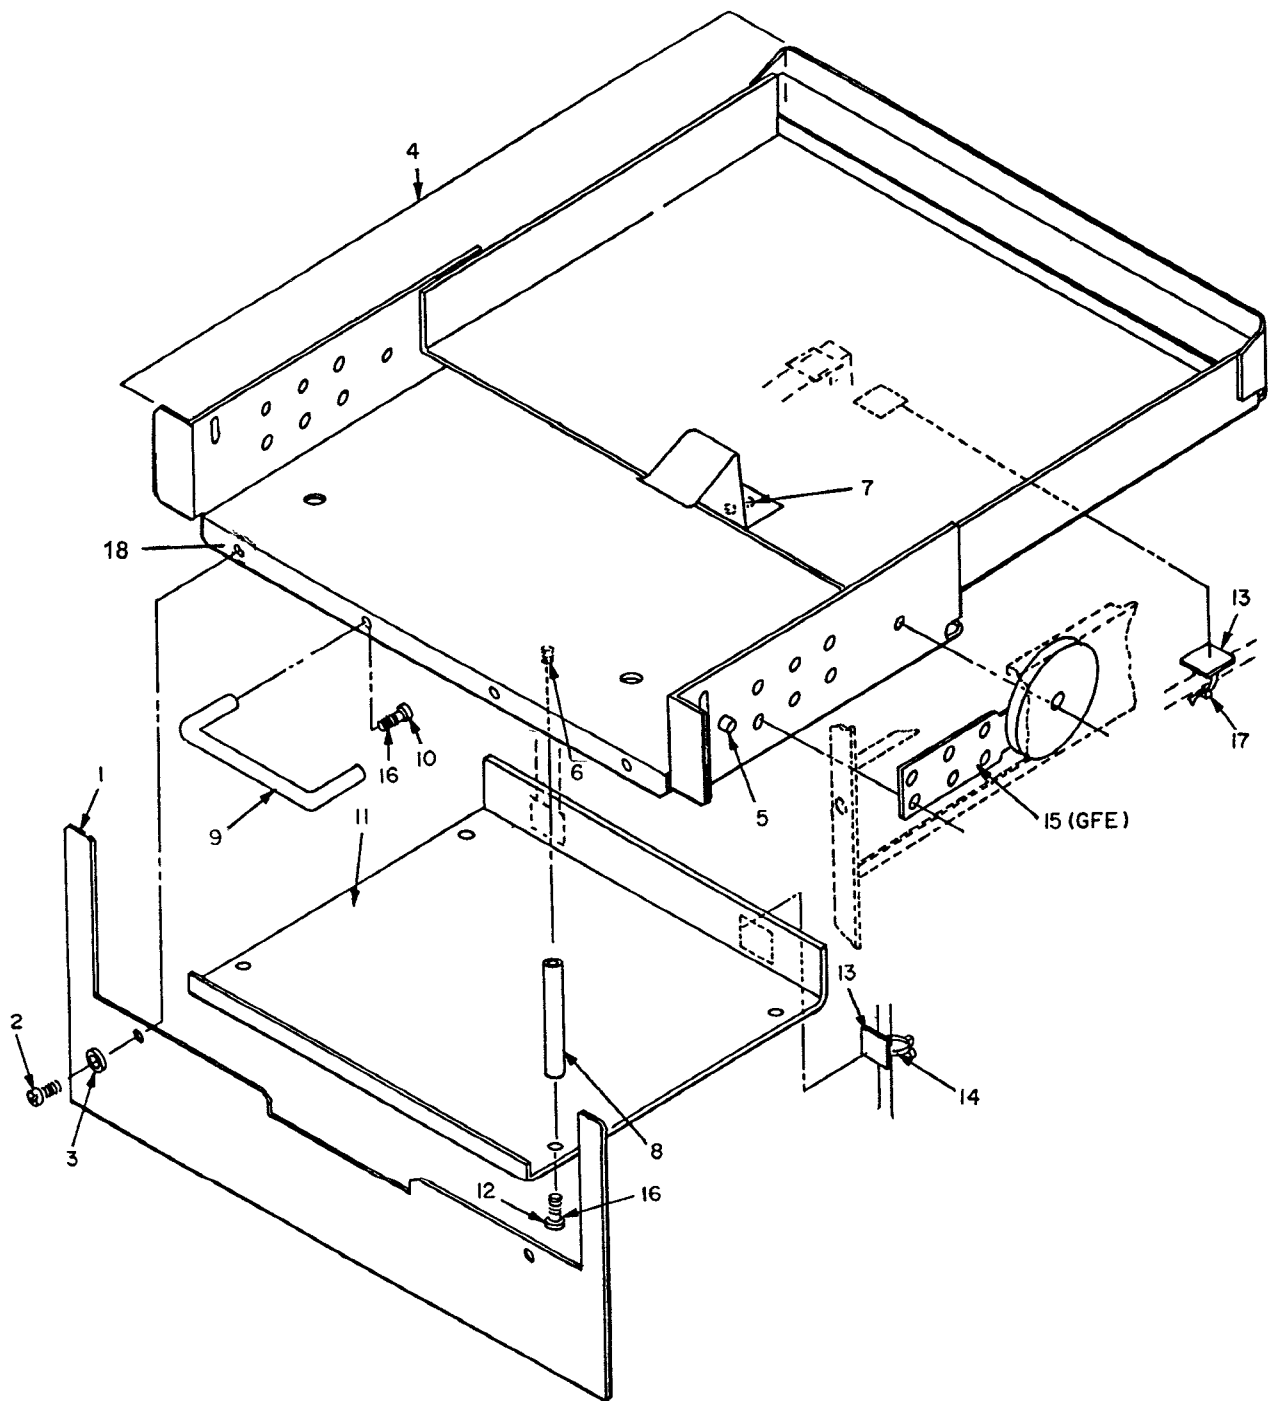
Installation of Printer Chassis Assembly and Paper Access Cover
